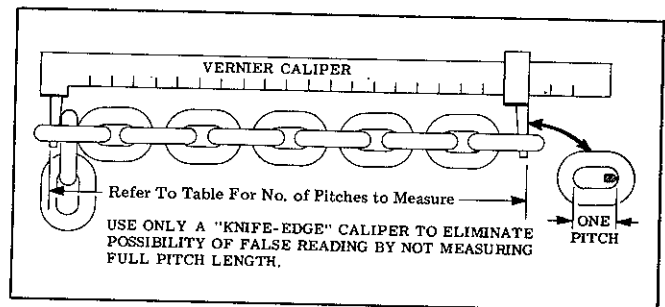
Checking Coil Chain Using Vernier Caliper
